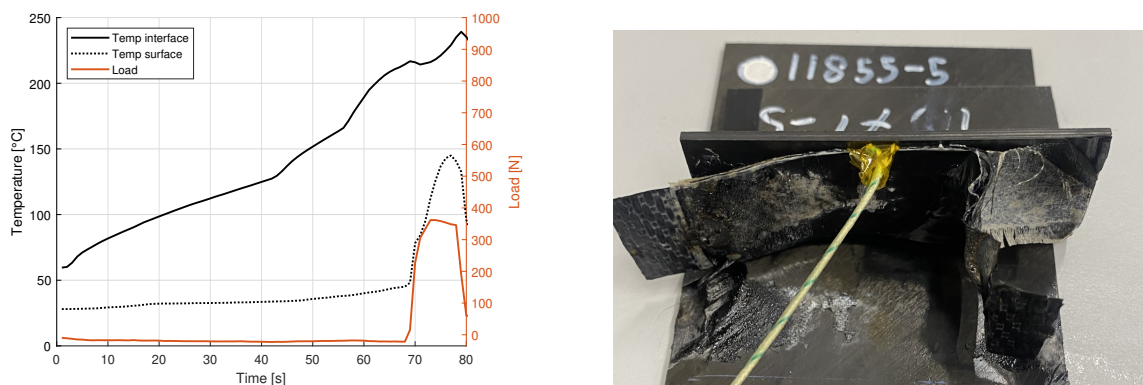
Deweld L stiff 18; Left figure Load / surface temperature plotted with respect to time. Right Figure displays the fracture surface after de-welding
